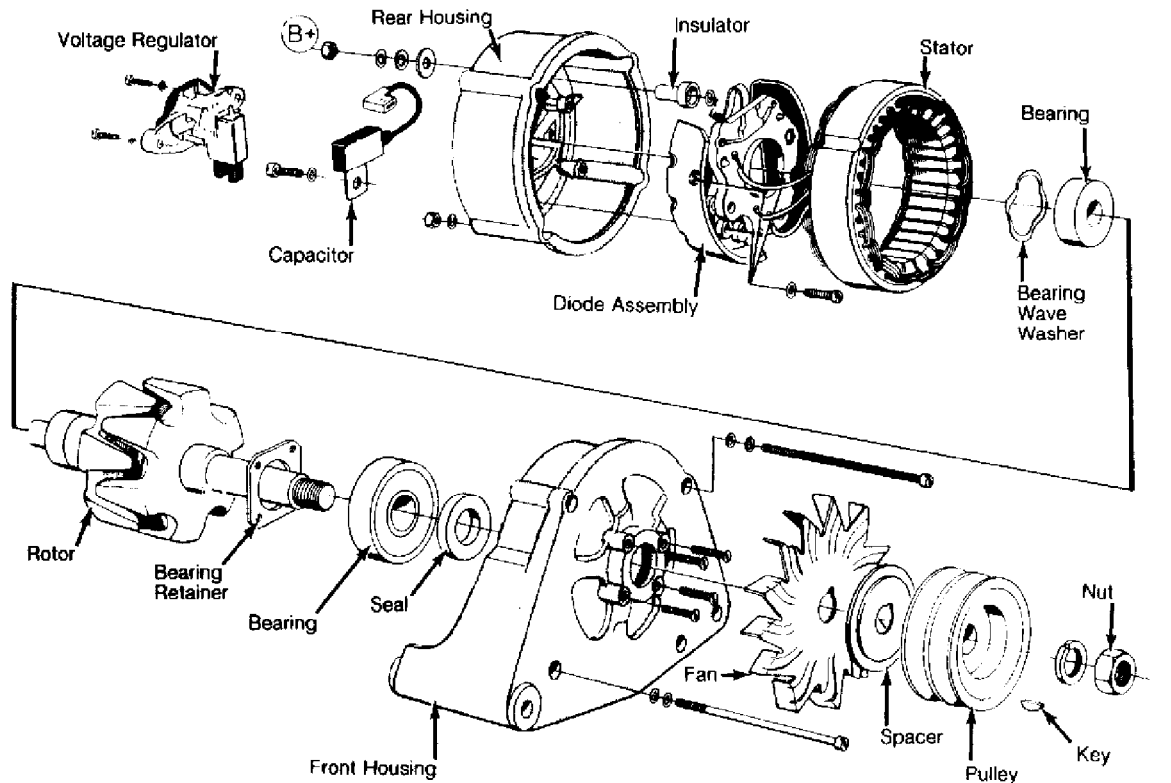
Exploded View of Bosch 110-Amp Alternator
